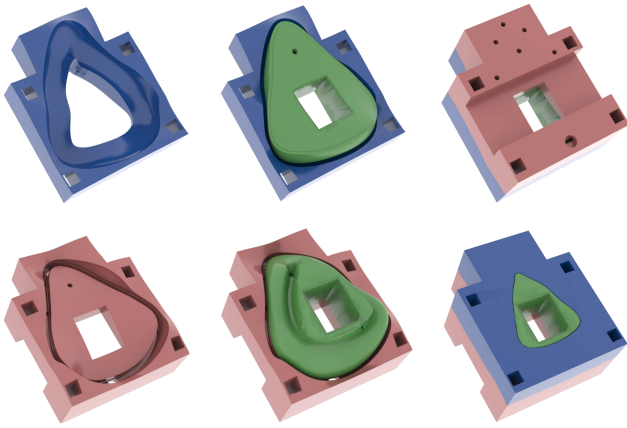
We model a 3-piece mold for fabricating our designed mask interface. The square holes are used for aligning the mold pieces. The large circular hole on the red piece is for casting silicone materials. The small circular holes on the red and green pieces are for getting rid of air in the mold.
